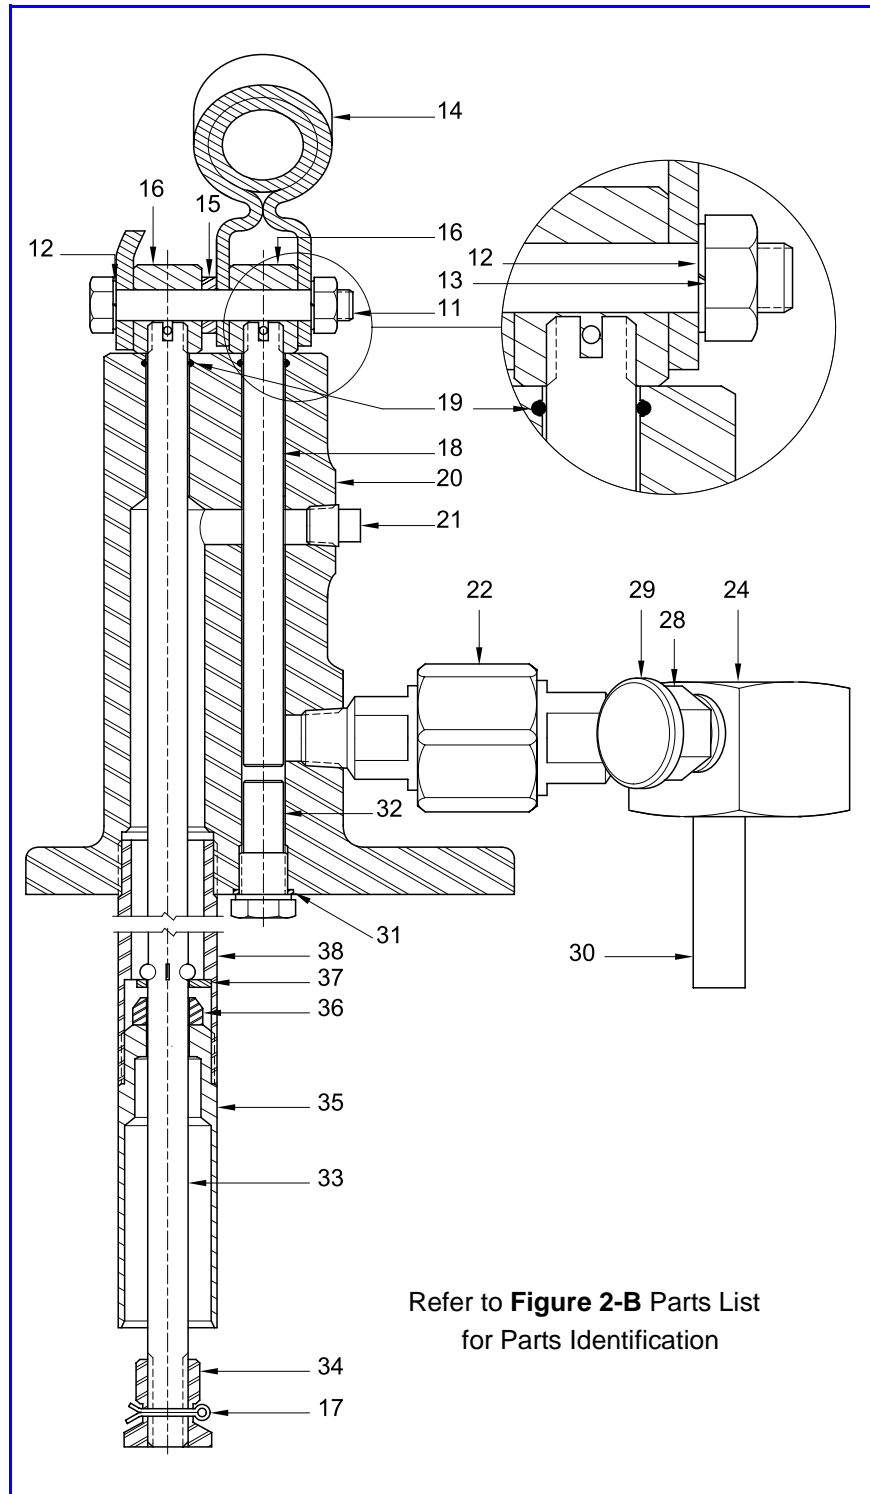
C Check Valve Assembly Model 54282 - Exploded View
